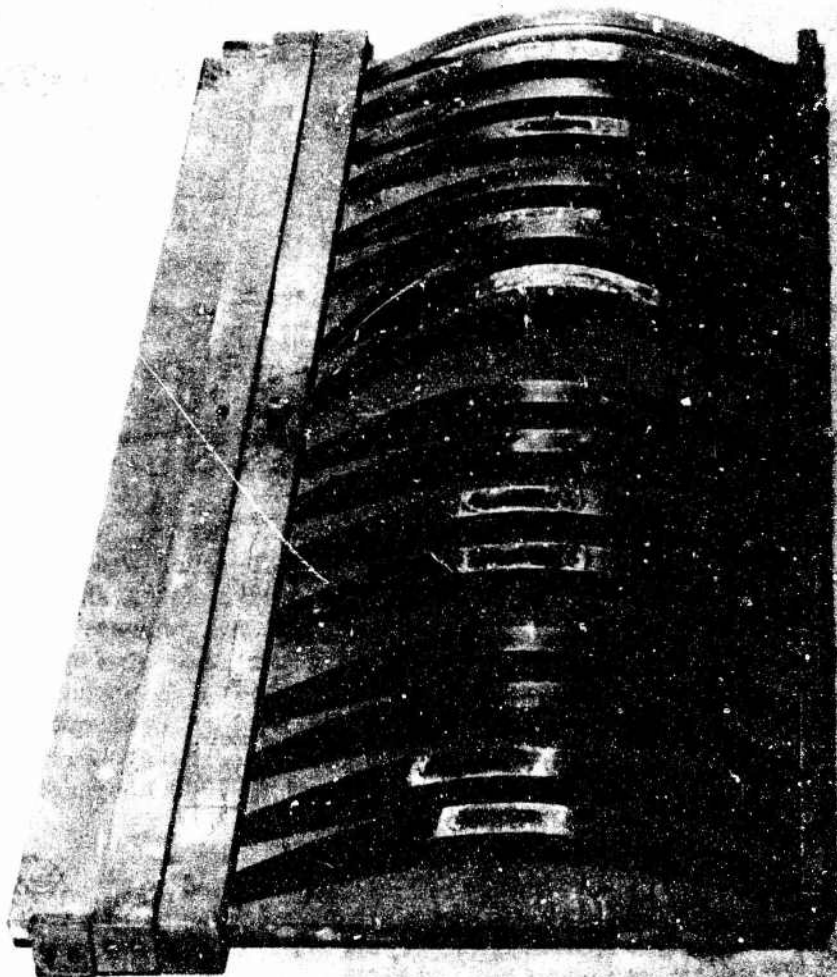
Specimens Mounted for Hot Salt Stress Corrosion Test - Side View
